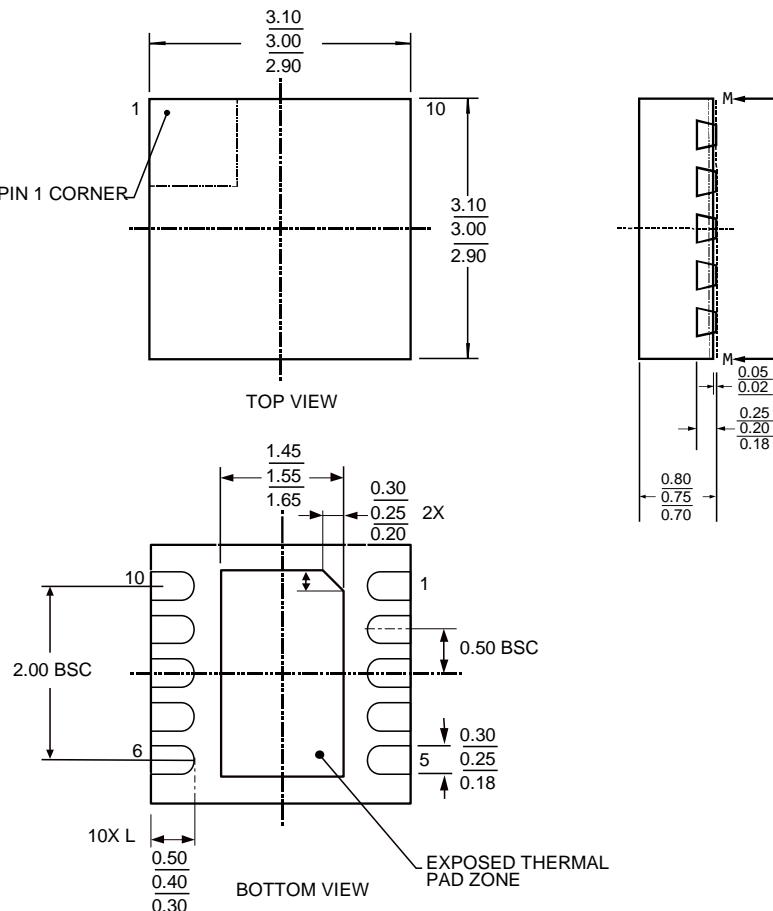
10-Lead DFN Package Dimensions shown in millimeter
